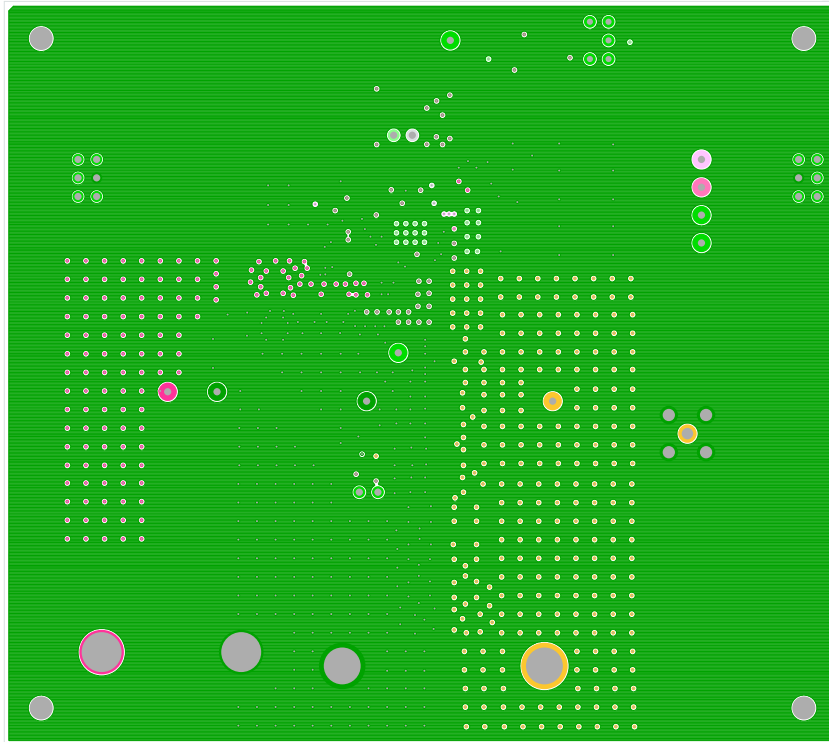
PCB - Inner Layer - Layer 2 (Top View)
